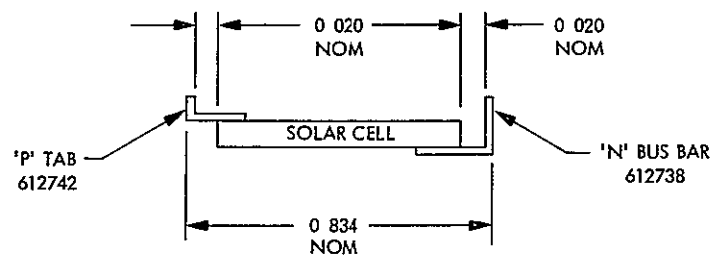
Submodule subassembly - before welding (Ref. 18)
